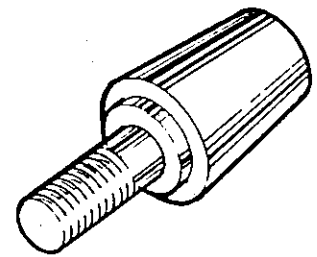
Camshaft oil seal protector No. 60-1810.
